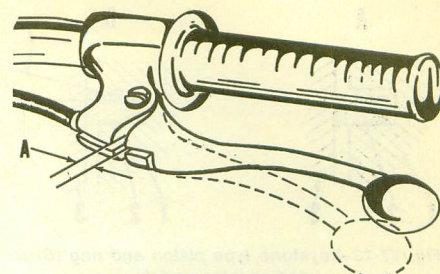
The clutch hand lever should have 2-3mm free play at (A).
